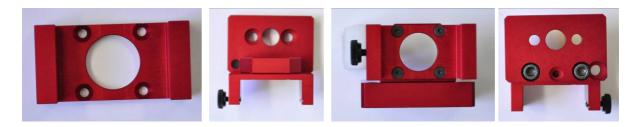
Camera holder (left) mounted on the adapter plate with the intermediate piece.
